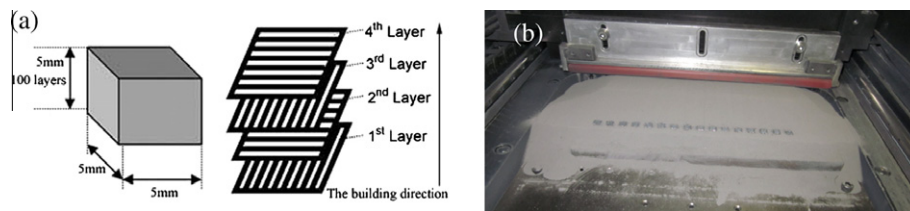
(a) Layer cross-hatching technique and (b) photographs showing real-time selective laser melting process.
